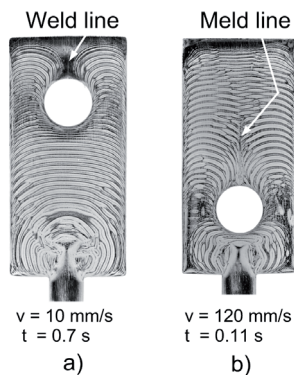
Moulded parts with weld lines (a) and meld lines (b)
